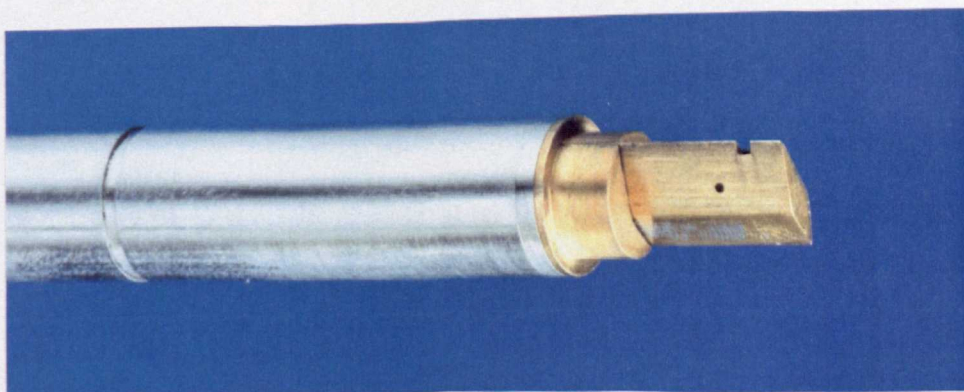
View of Re-Designed Wedge Probe Showing Probe Blade and Stepped End of Guide Tube
